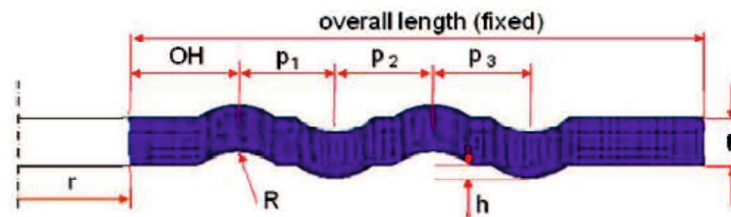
Initial gasket cross section and design parameter (adapted from [18])
